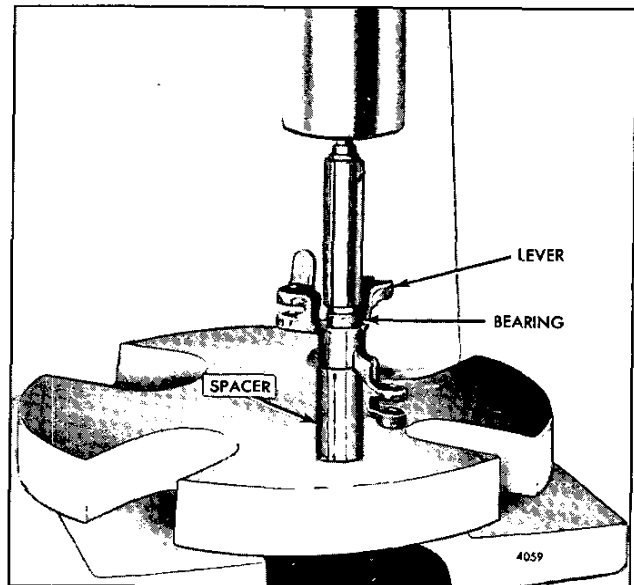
Installing Bearings in Control Link Lever Using Tool J 21068
